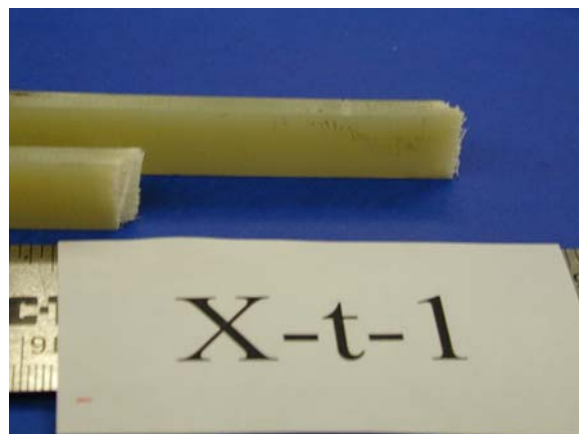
Photograph showing failure mode; Specimen X-3.
